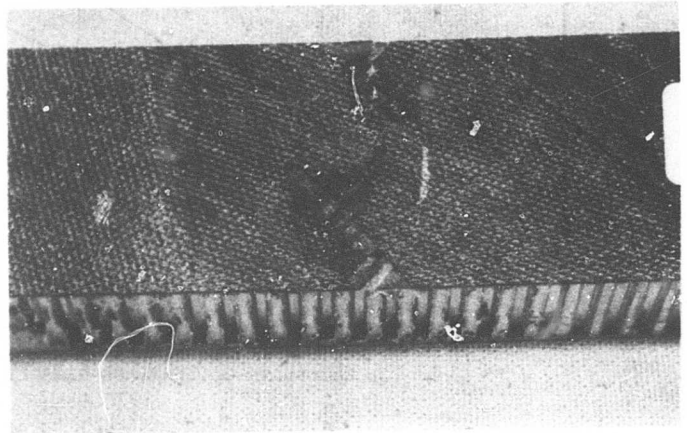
Typical Failed Static Mixed-Modulus Sandwich Beams.
